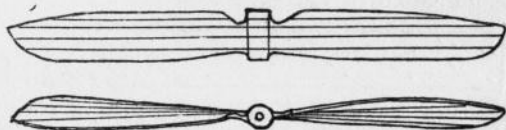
Side elevation and plan of a helical screw built up of several pieces of wood.
